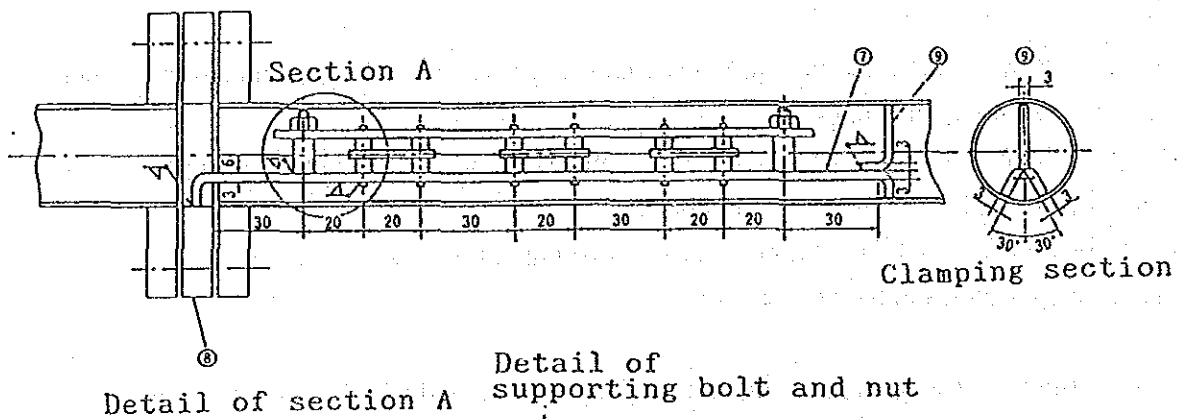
Example of pipe holding jig and specimen ⁵
